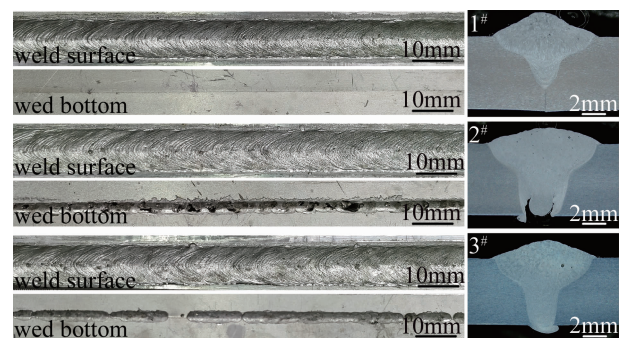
Macroscopic morphology of joints and weld junction under different laser powers
